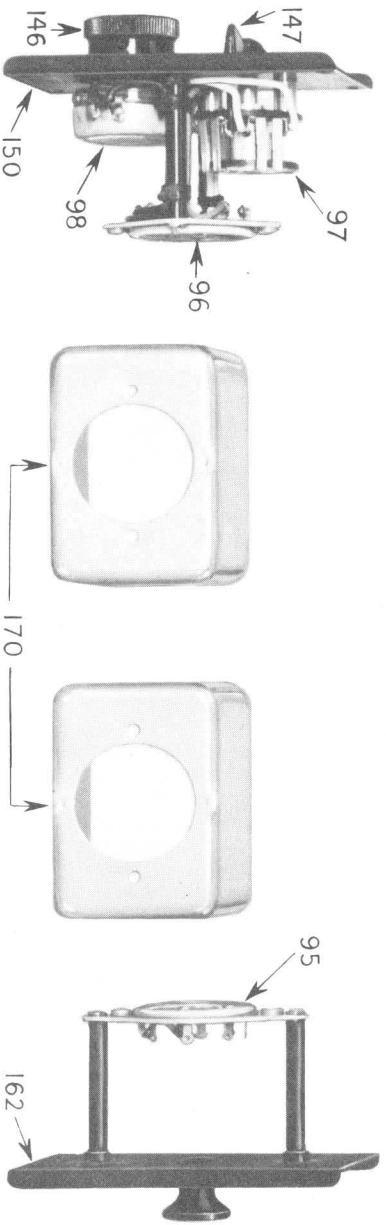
TYPE CBY-23154 SWITCH PANEL AND TYPE CBY-49109 SWITCH PANEL ADAPTER
